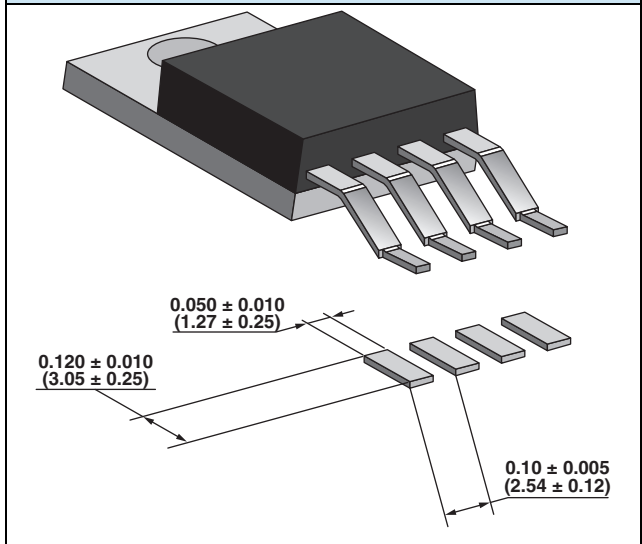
VPR221S DIMENSIONS in inches (millimeters)
